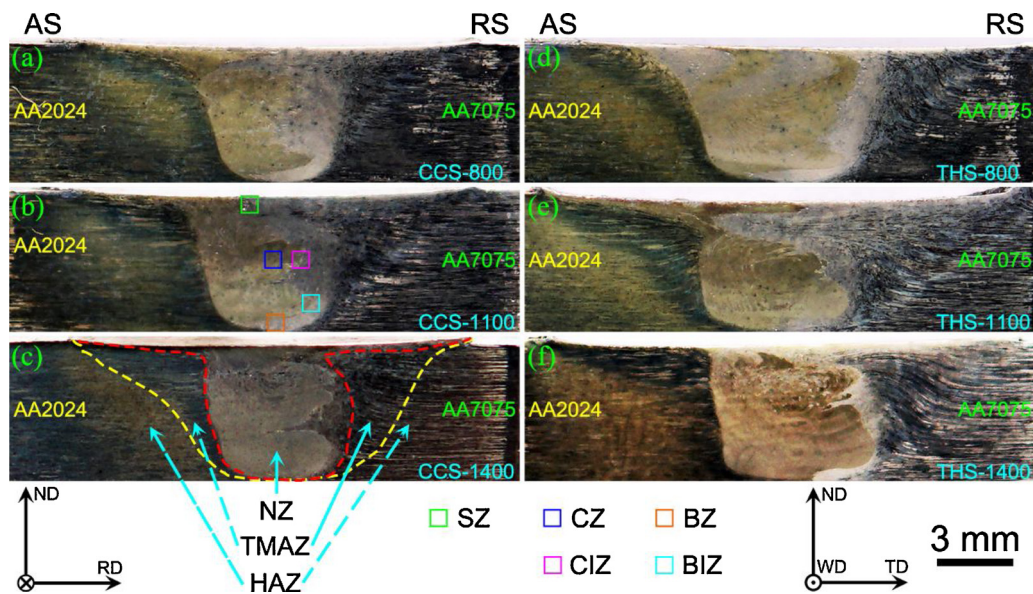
Macroscopic appearances of in the six joint cross sections: (a) CCS-800, (b) CCS-1100, (c) CCS-1400, (d) THS-800, (e) THS-1100 and (f) THS-1400.
